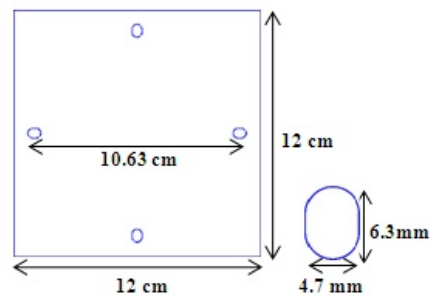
Layout for alignment holes on UTC sheets (left), size of each hole (right)
